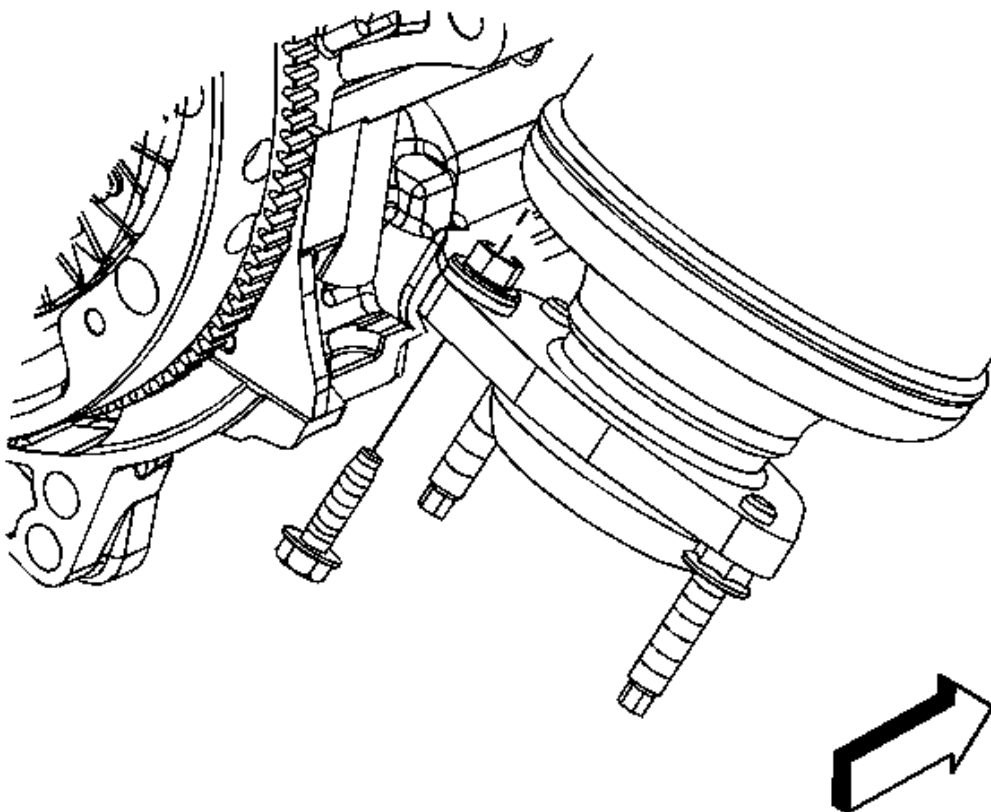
View Of Catalytic Converter Bracket & Bolt
